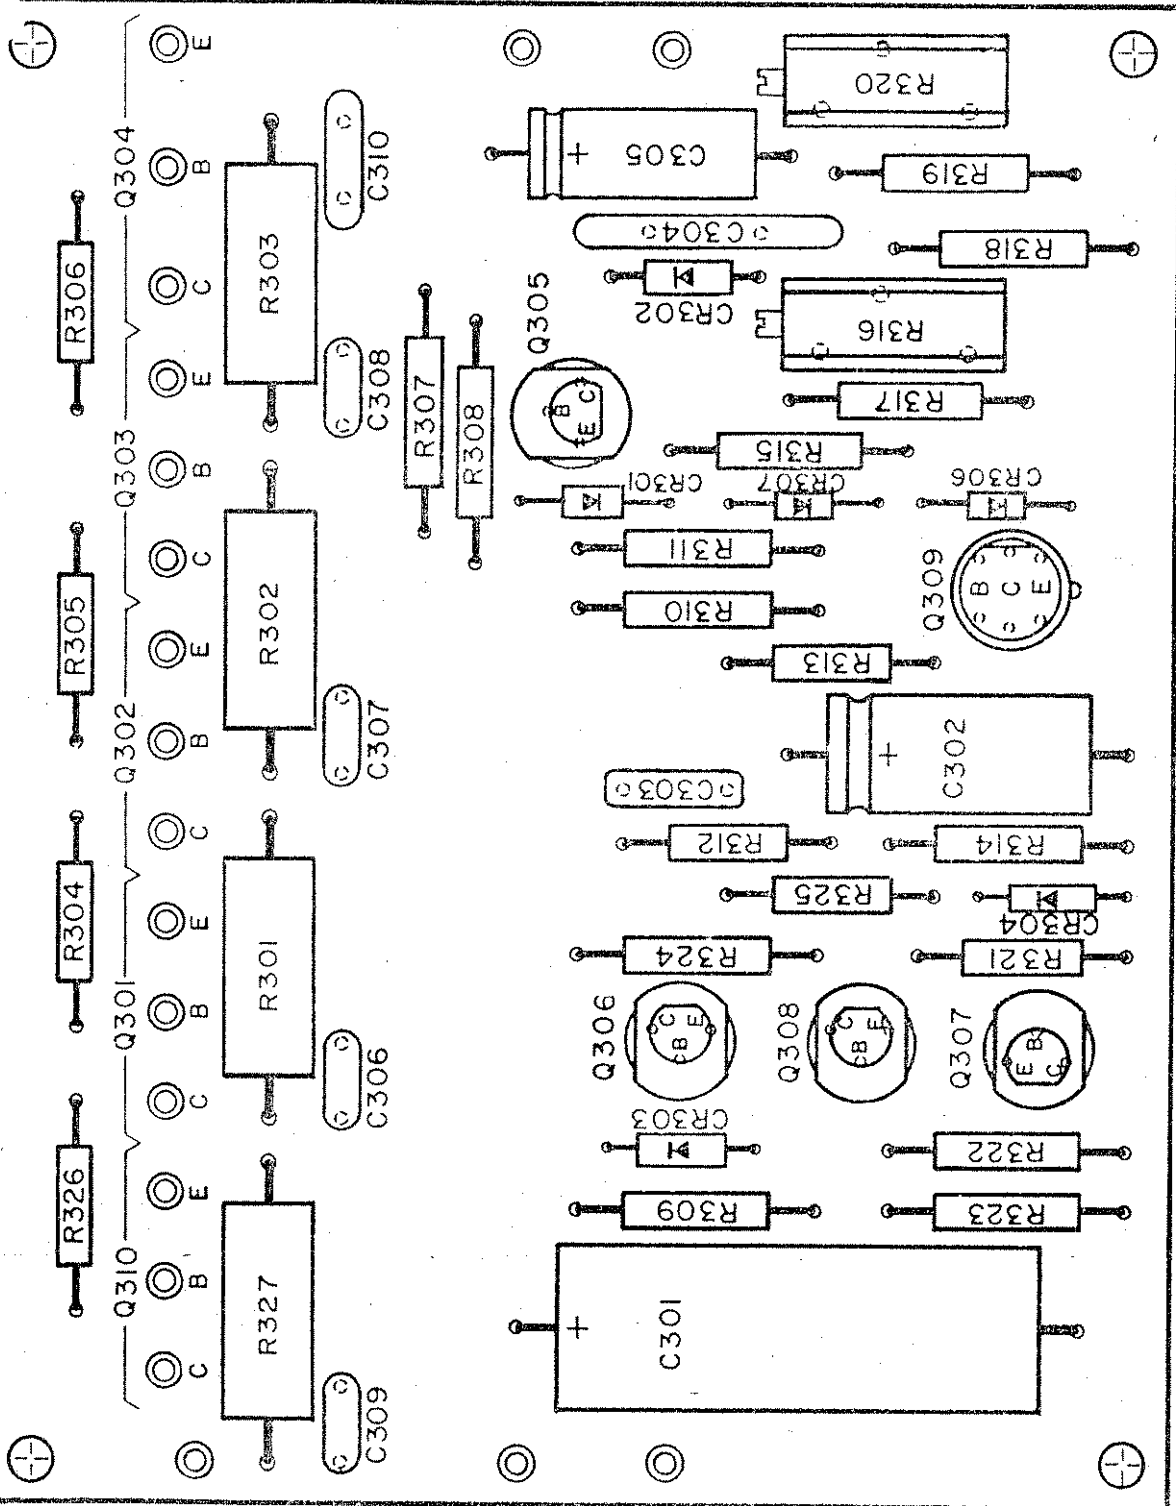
COMPONENT LAYOUT - POWER SUPPLY P.C. BOARD ASSEMBLY (C-40566)
